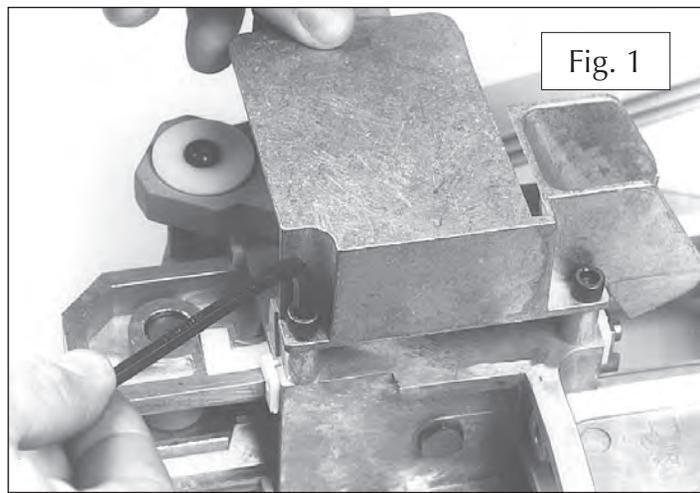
Install the ejected cartridge chute bracket (#13659) with two large screws (#13976) from the parts bag.
